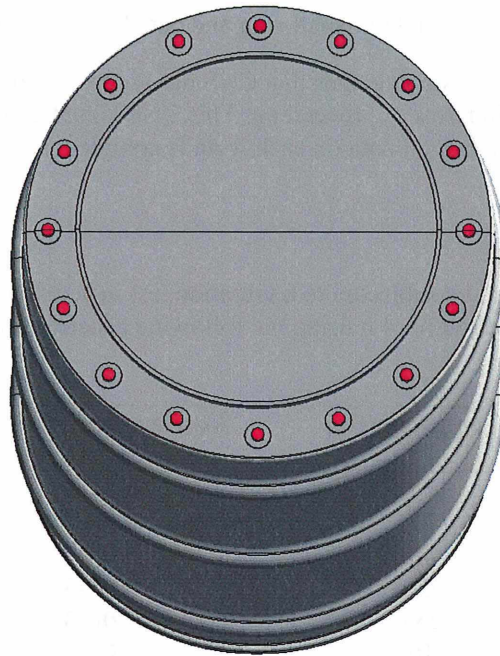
Model of the CV assembly and CV flange wedge installed with the drum lid removed.
